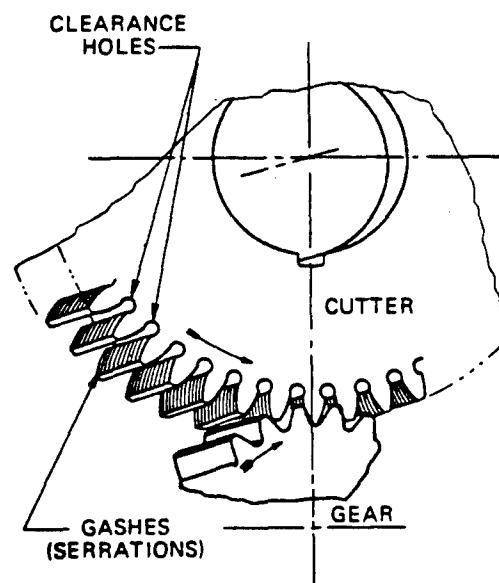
Work Gear in Crossed-Axes Mesh with Rotary Shaving Cutter Mounted Above (1)
